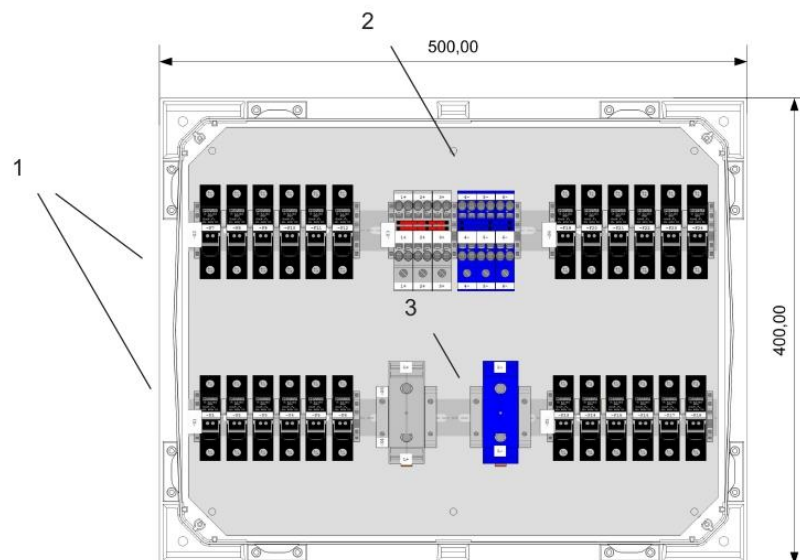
Housing dimensions/mounting plate layout - view from the front
